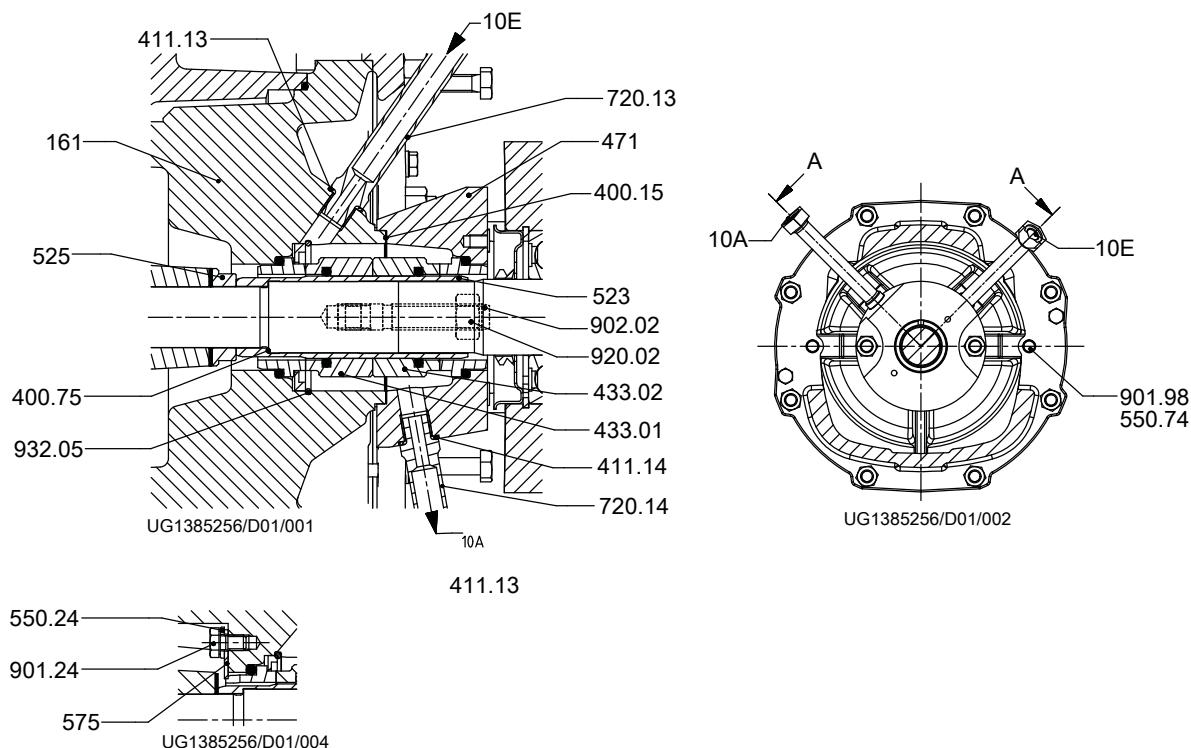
Variant with double mechanical seal in back-to-back arrangement
